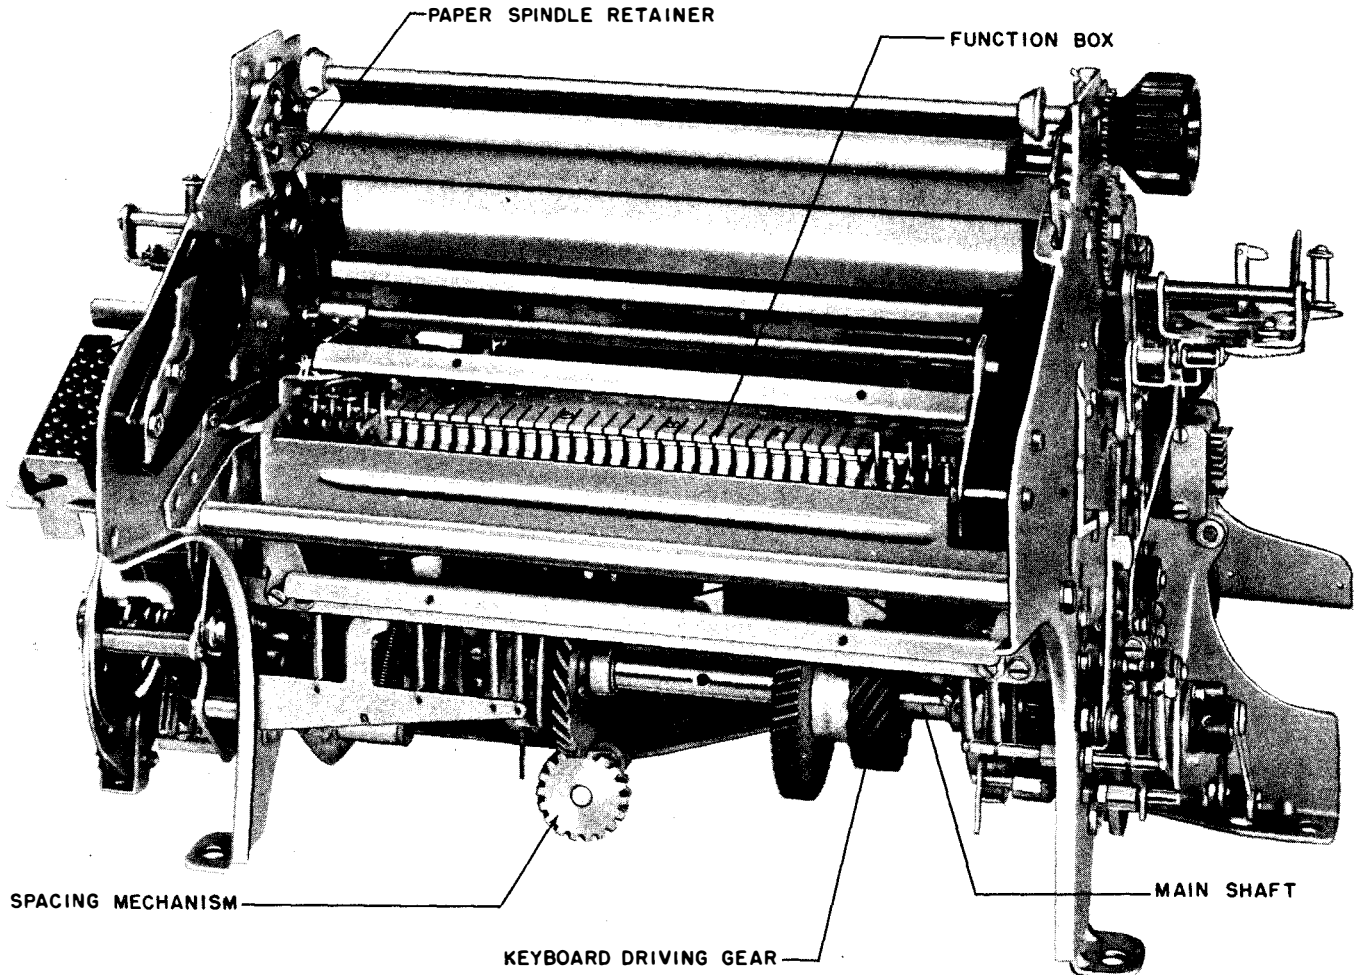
Automatic Typewriter MX-1115A/UG, Rear View
